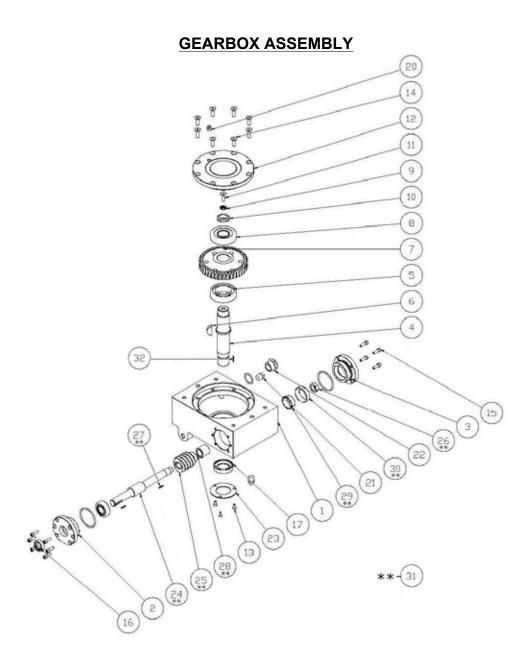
Gearbox Assembly Note: Right hand gearbox shown.
